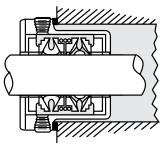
Forced cooling by connections to inlet and outlet ports, using liquid being sealed.
